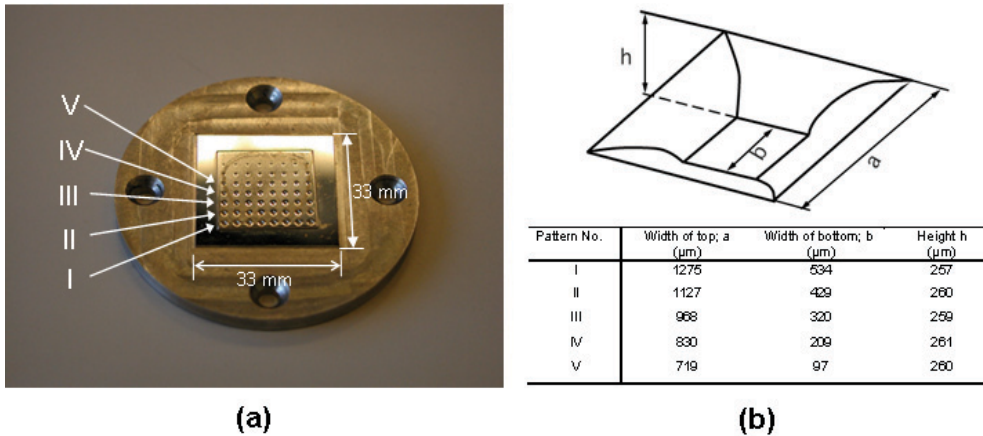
Photograph of electroformed -Ni mold and details of measured pattern size.
